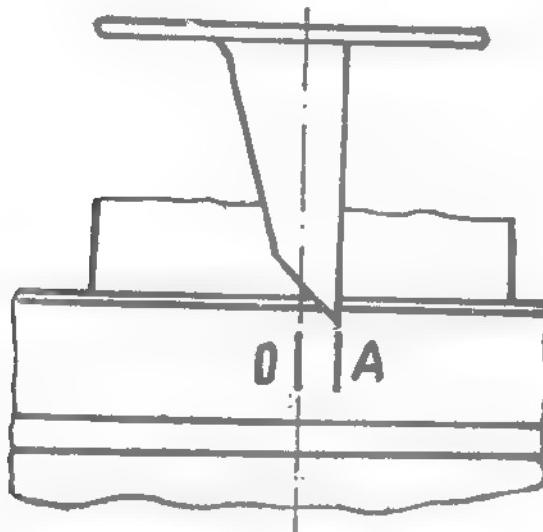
ADJUSTING IGNITION TIMING BY ARO L-25 ENGINE
